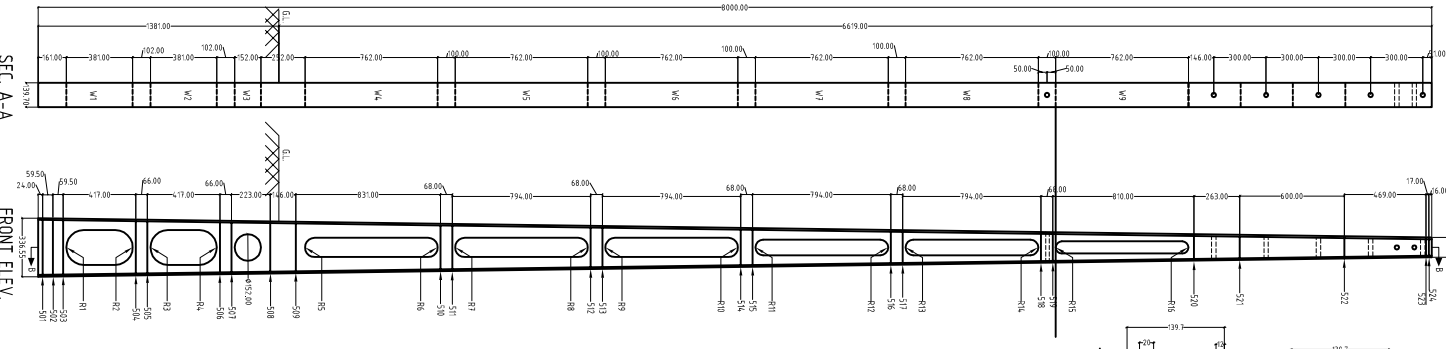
DETAILS OF I/C-O/G CABLE ENTRY-EXIT HOLE ARRANGEMENT
